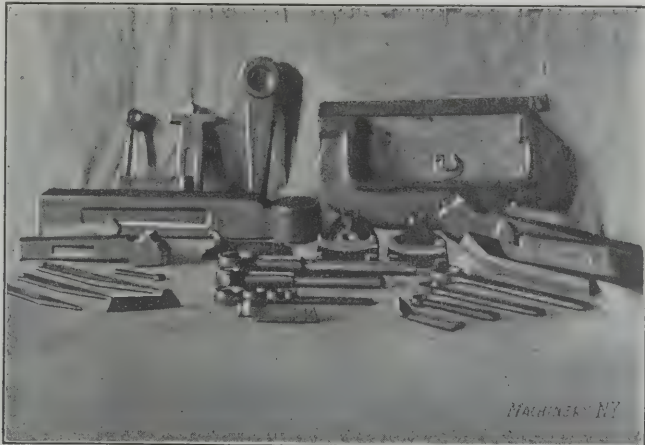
shows a number of drop-forgings, including tool-holders, wrenches, drifts and a C-clamp with the flash still in place. These forgings are just as they came from the steam hammer. A trimmed-off flash is shown on top of the large C-clamp in the middle of the group. Fig. 7 shows a lot of lead proofs of dies for making various sizes of drop-forgings from the smallest to the largest. The big C-clamp shown is 18 inches long and the sizes of the other parts can
